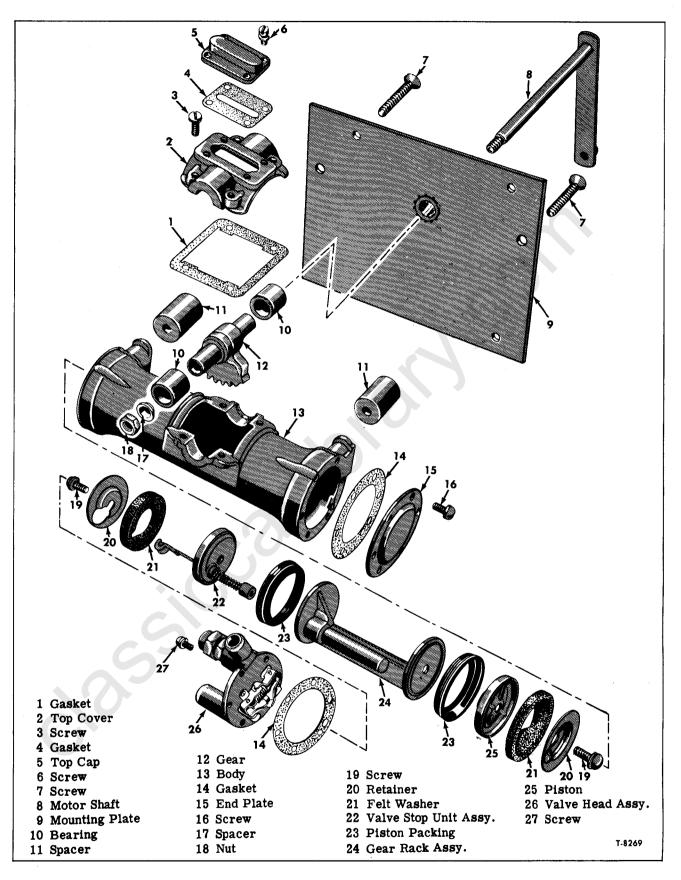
Air Operated Windshield Wiper (Series 90 Conventional Cab)
